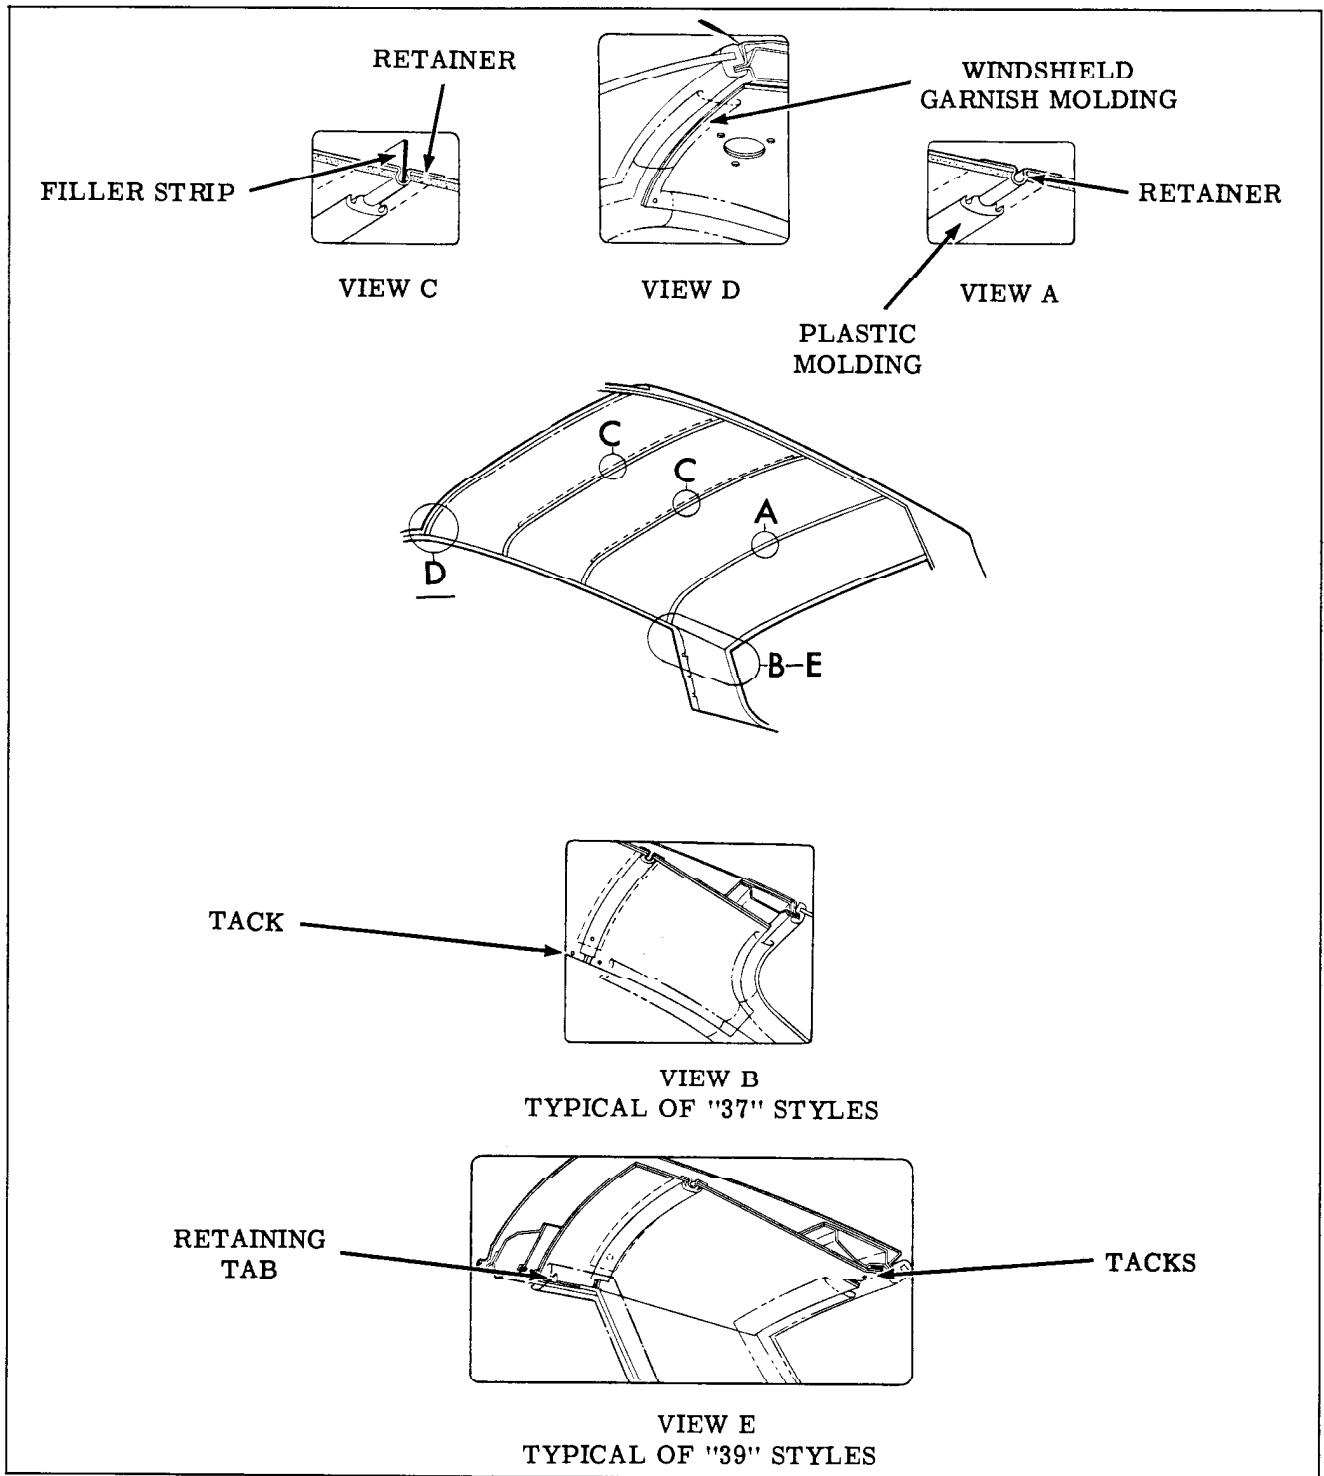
Headlining Assembly ("37" and "39" Styles)
